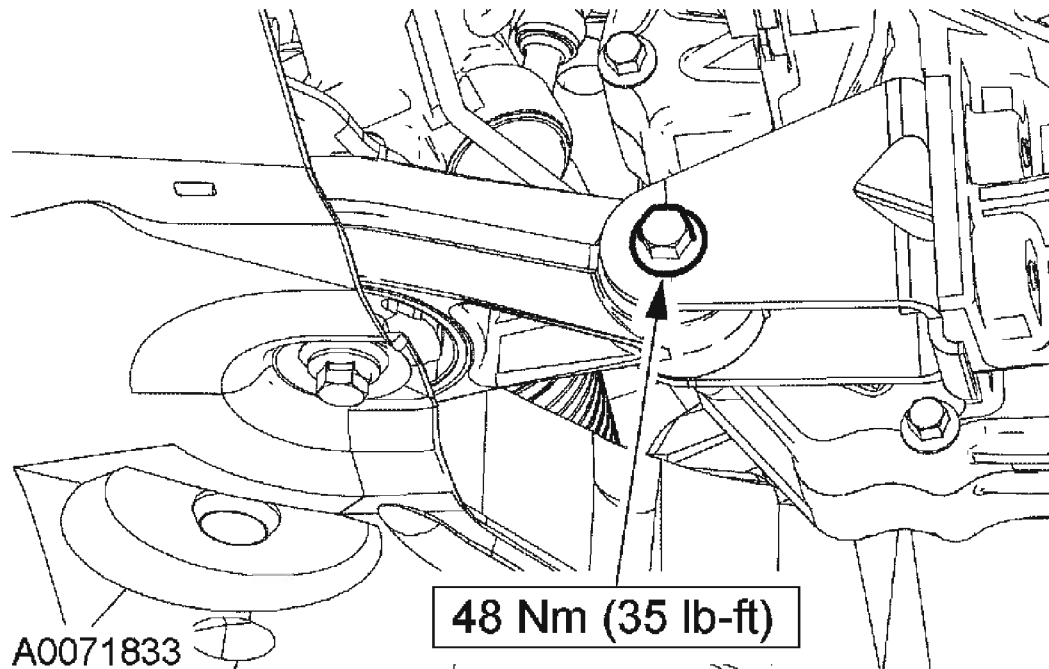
Removing Engine Roll Restrictor Mount Bolt
